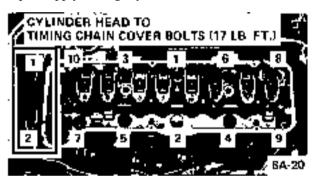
A-20 Cylinder Head Bolt Tightening sequence
